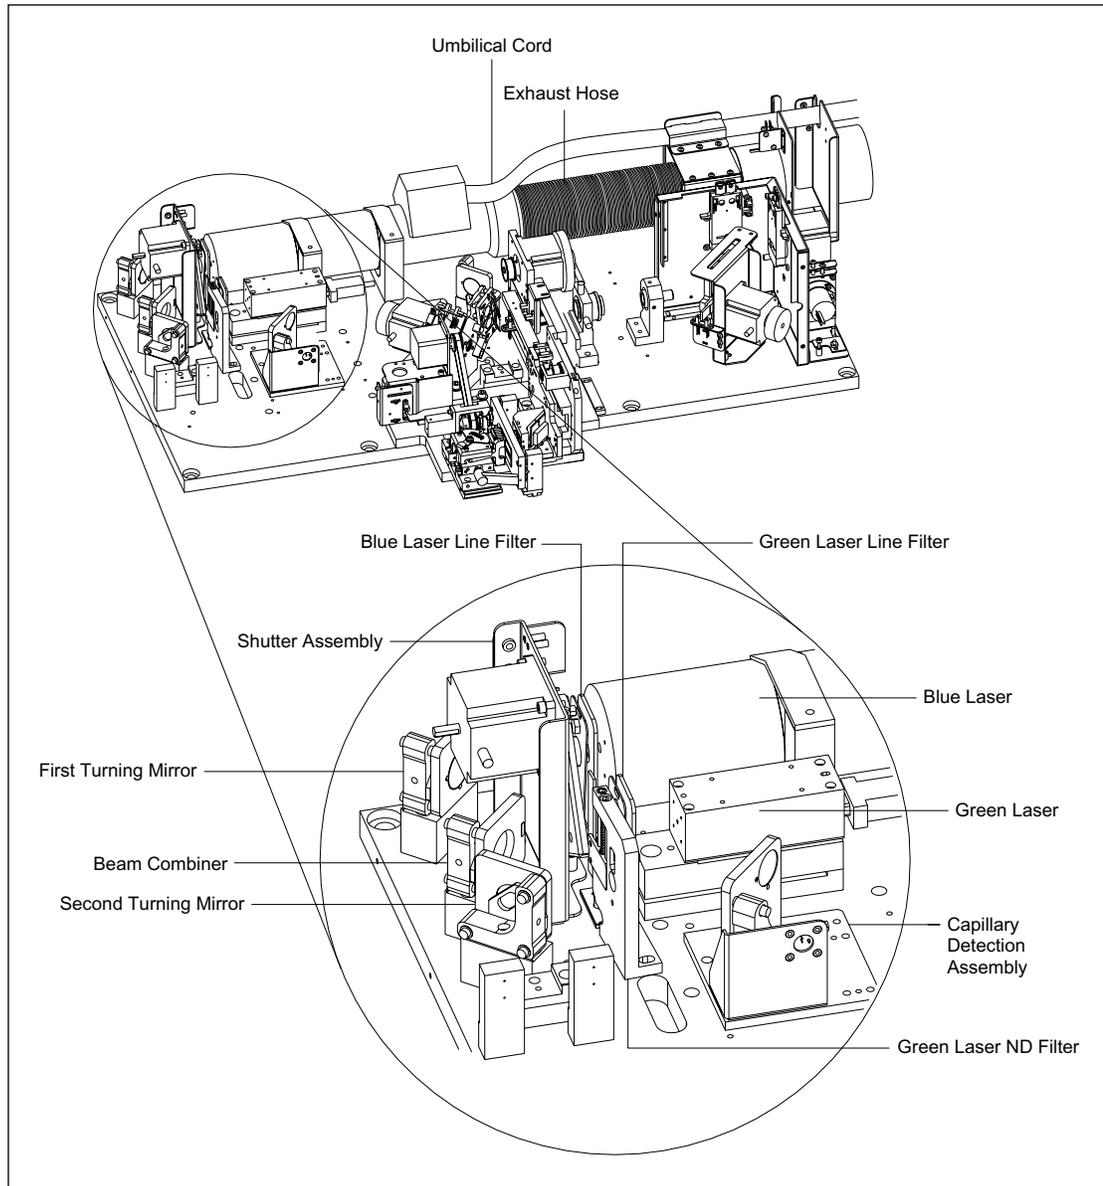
Optical Components Assembly (Sheet 1 of 3).
